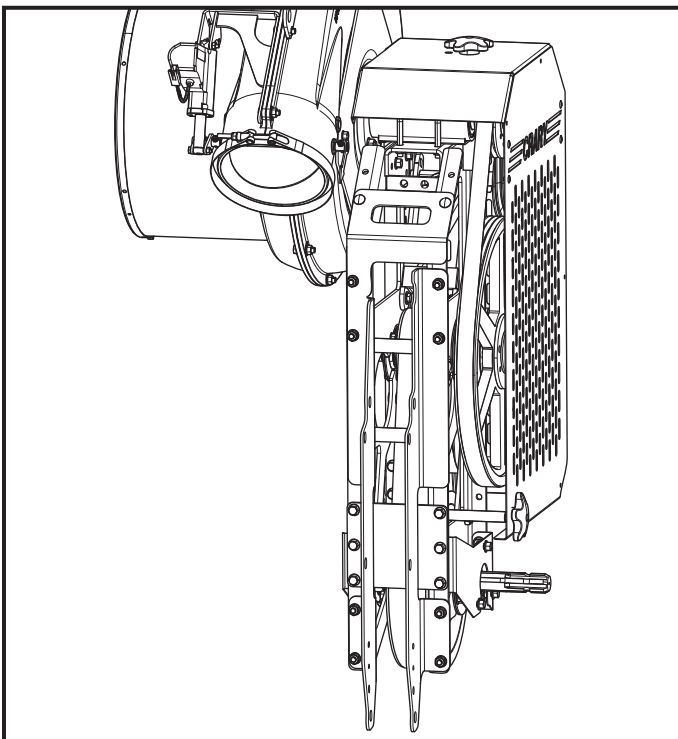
LH & RH mount brackets attached to Belt Drive Assembly, from front left side
